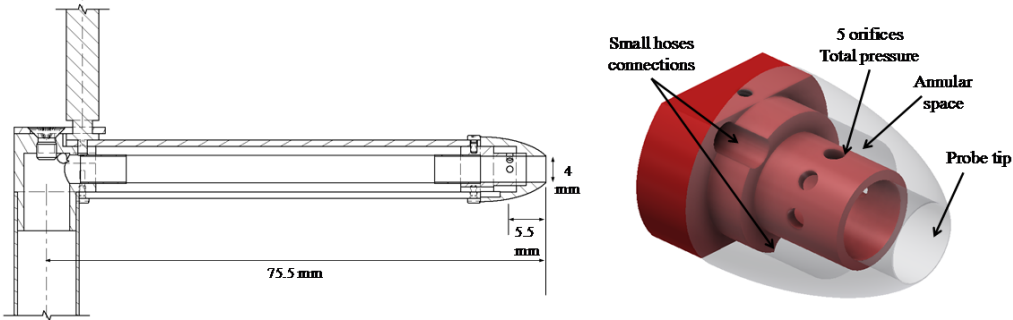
2D Isokinetic probe dimensions and details of probe head
